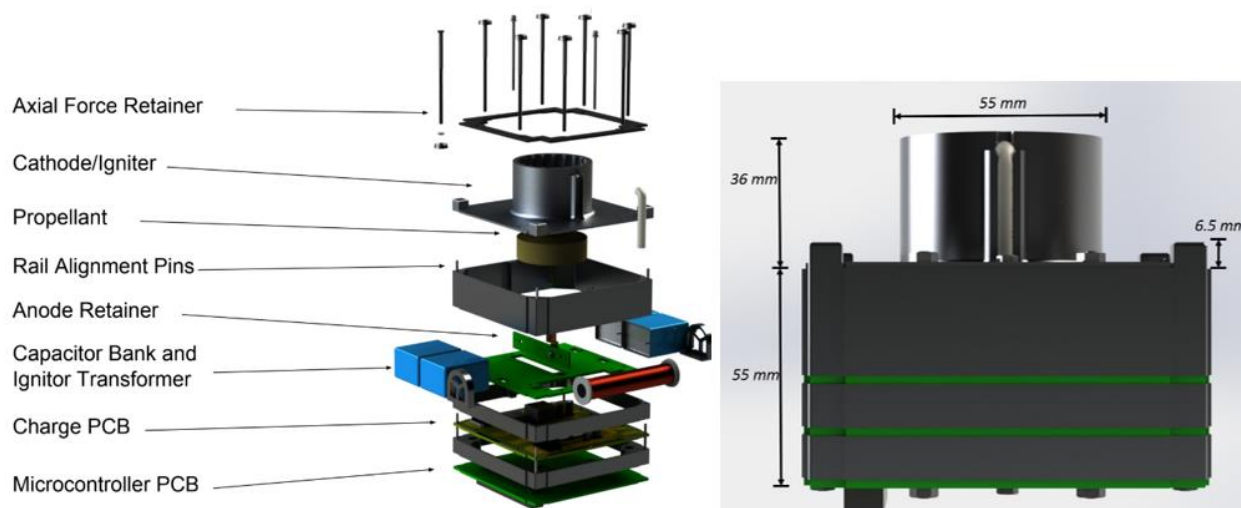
Exploded view and dimensions of CubeSat thruster
